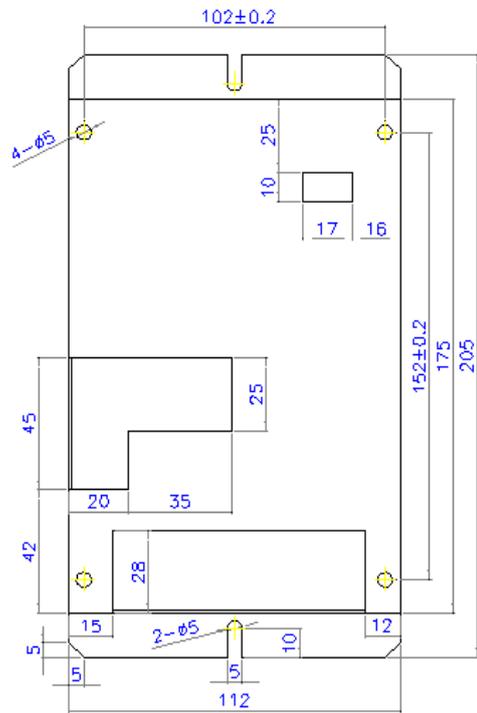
(B) Mounting Dimensions of SM-04-UL
